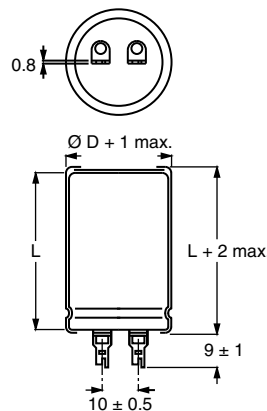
Solder-lug versions (SL): only available in 050 series
